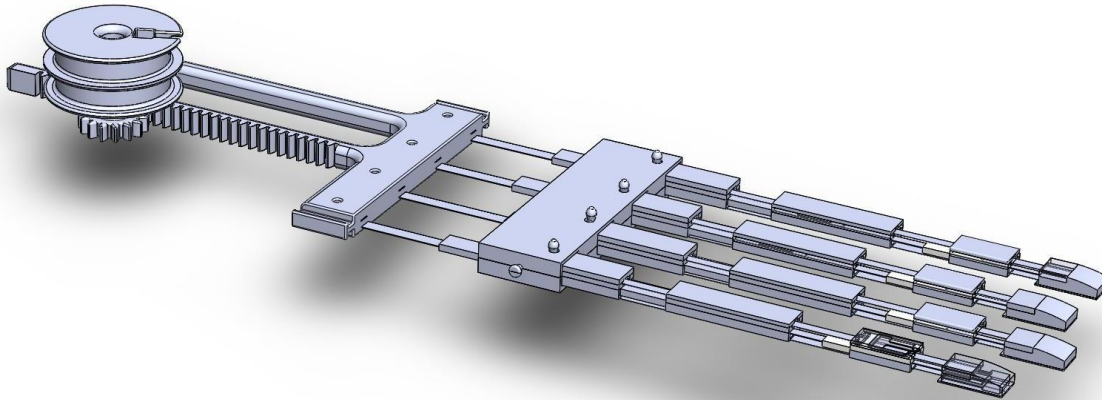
Final CAD Model: Inner mechanisms of hand module without housings and casings.
